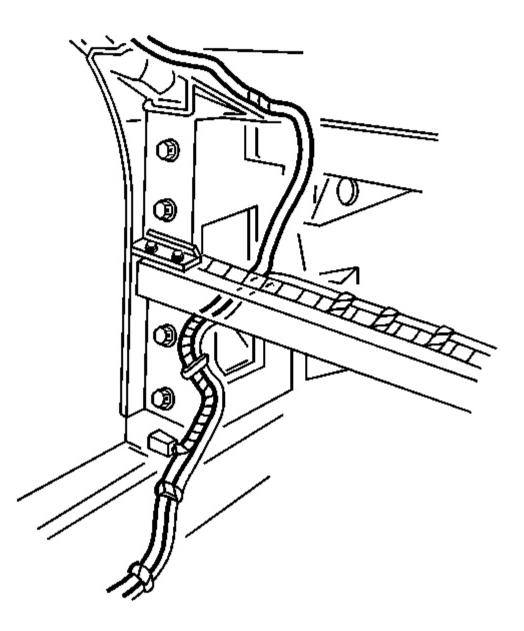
Coaxial Cable At Insulation Tape Along The Hinge Pillar Courtesy of GENERAL MOTORS CORP.
